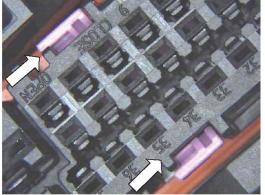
38 was connector, operating tool in Final position Abb. 21: Kabelbaumstecker 38-polig, Betätigungswerkzeug in der Endposition
